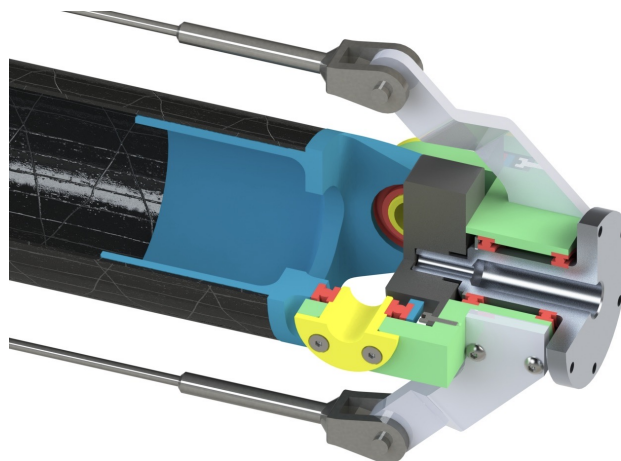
Section view of the elevation and roll axes on the boom mounting end. Bearings are shown in red and the hollow stainless steel shafts are shown in yellow.
